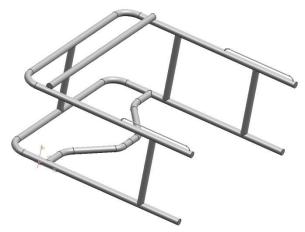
Proposed Frame for Pneumatic Scissor Lifting Mechanism
